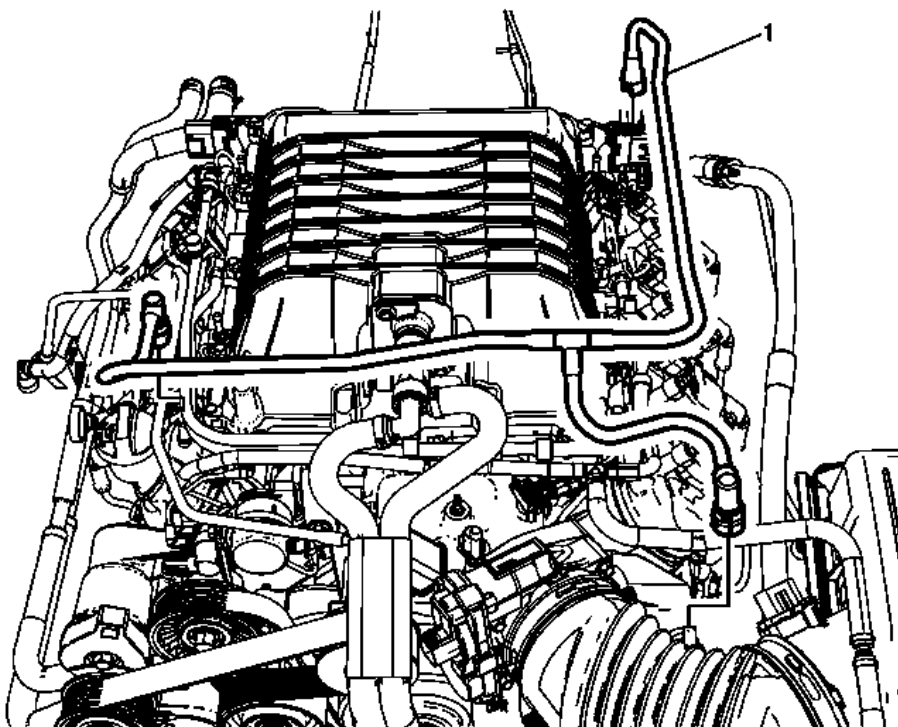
Positive Crankcase Ventilation Hose/Pipe/Tube (Clean Air)
